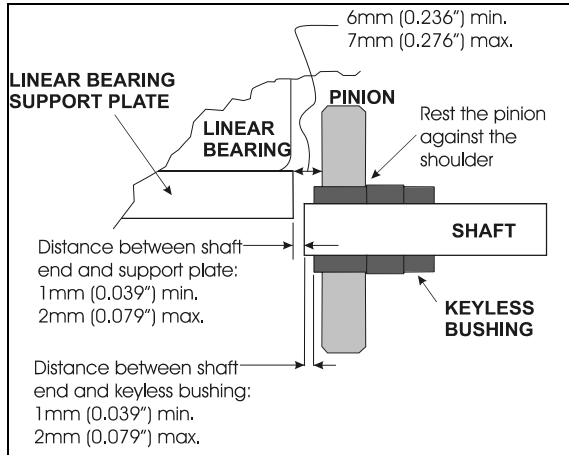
PINION AND KEYLESS BUSHING POSITIONING
